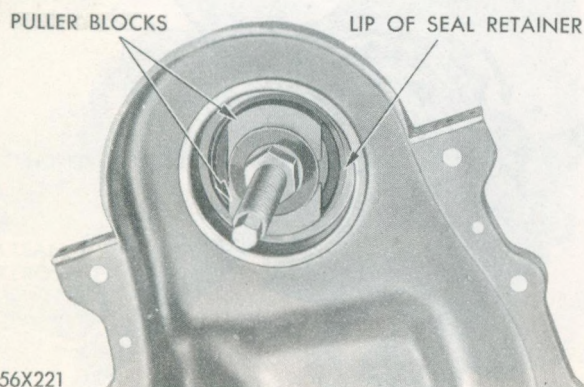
Puller Blocks Expanded to Correct Pulling Position
